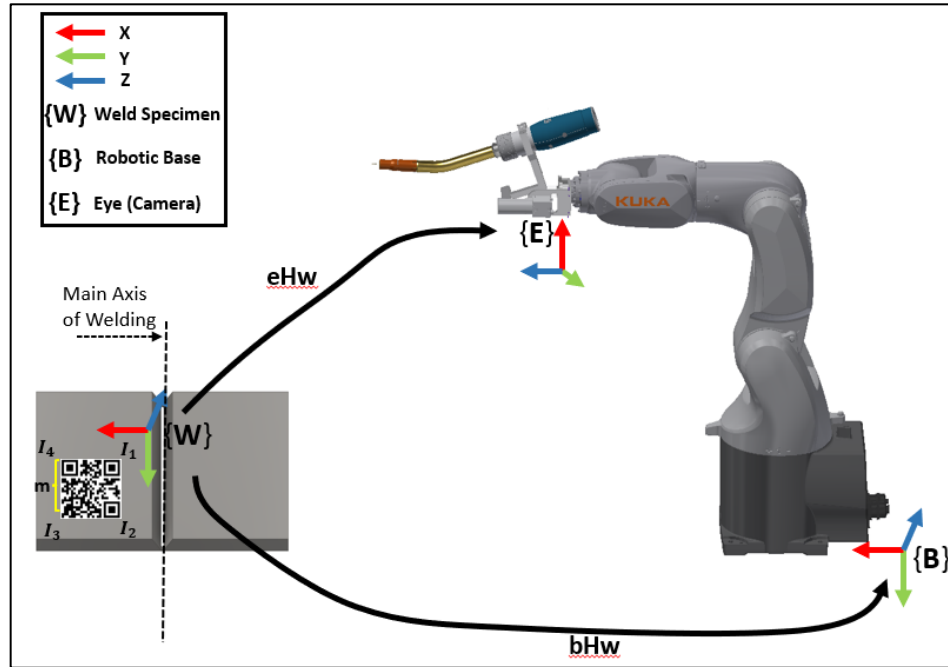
A fiducial QR code marker was placed in the weld joint to relate the pose of the welding specimen relative to the robot base
